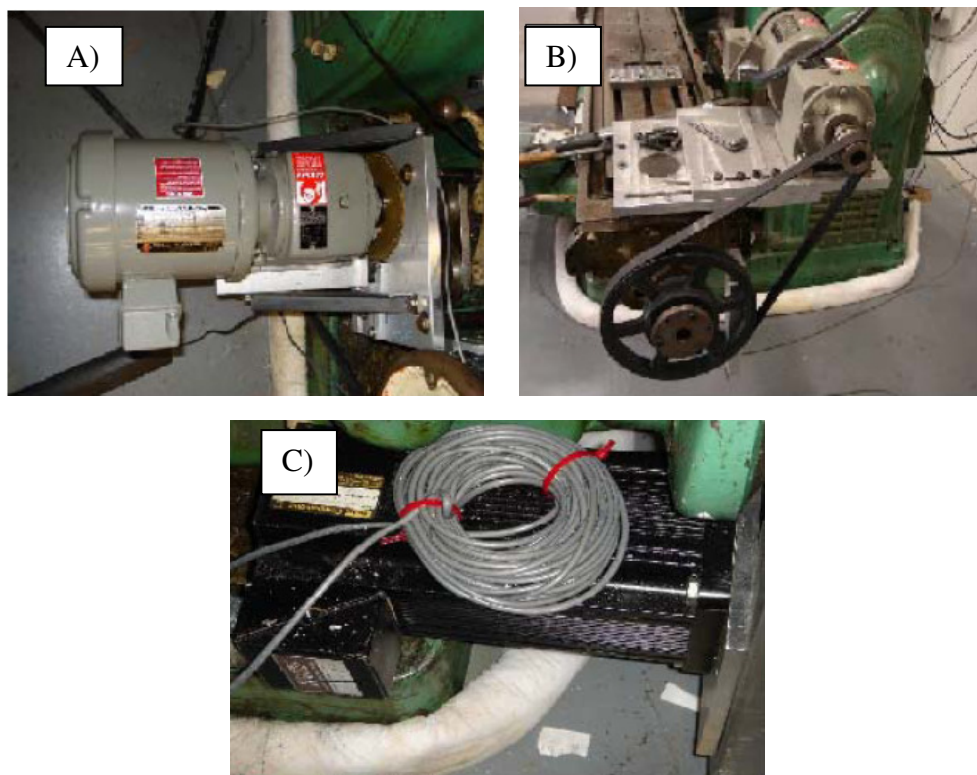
FSW Machine Motors (A) The lateral motor and drive head. (B) The traverse motor and drive train. (C) The vertical stepper motor
